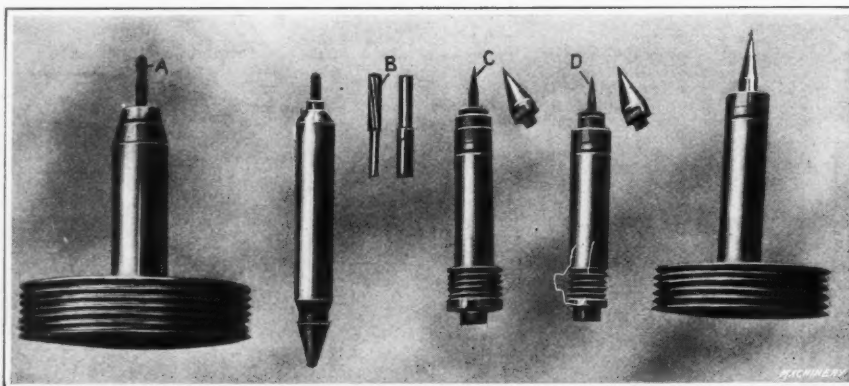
Roughing Cutters A and B; and intermediate and Finish Engraving Tools C and D
